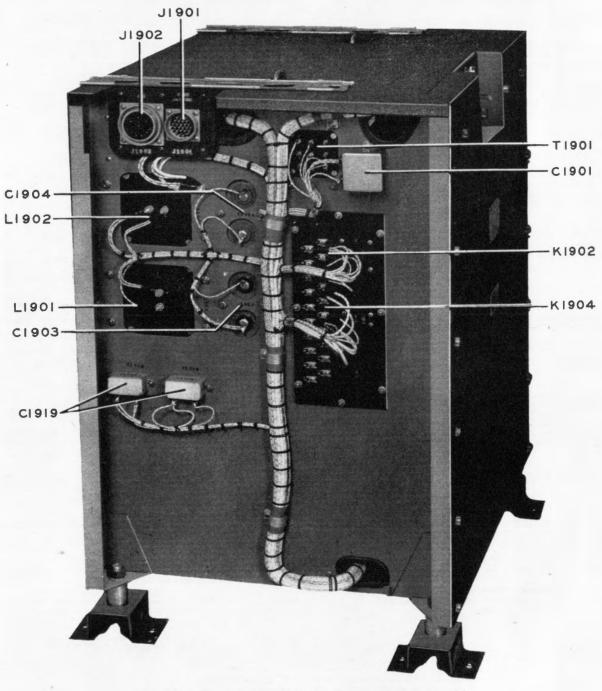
Type COL-211102 Dynamotor Assembly Left Side Open View
